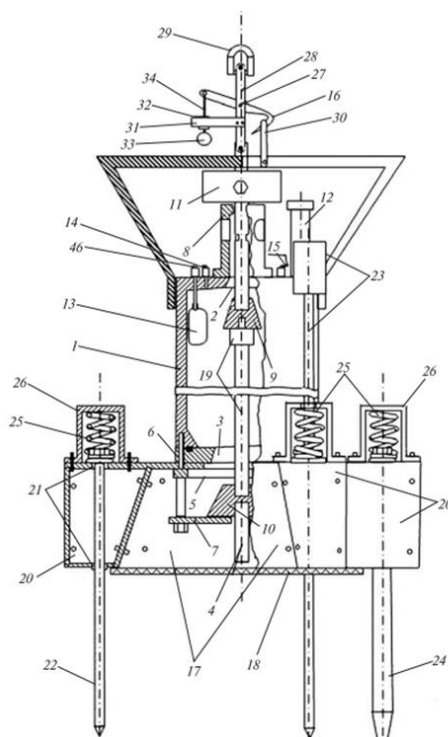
Geological complex for studying water bottoms (including additional elements: 1 – sealed body, 2, 3 – upper and lower parts of the body, 4 – rod, 5 – platform, 6 – flange, 7, 8 – upper and lower parts of the guide bushing, 9, 10 – sampler-degasser valves, 11 – cargo, 12 – pressure compensator, 13 – device for changing the sample volume, 14 – gas tap, 15 – water tap, 16 – hook kicker, 17 – water intake, 18 – filter, 19 – stock, 20 – plate rectangular-trapezoidal consoles, 21 – fixing holes, 22 – stabilizers, 23 – geological meter, 24 – bottom soil sampler, 25, 26 – shock absorber, 27 – axis, 28 – cheeks, 29 – bracket, 30 – loop, 31 – additional console, 32 – bushing, 33 – counterweight, 34 – flexible cable, 46 – tap. The photo is taken from publicly available sources
